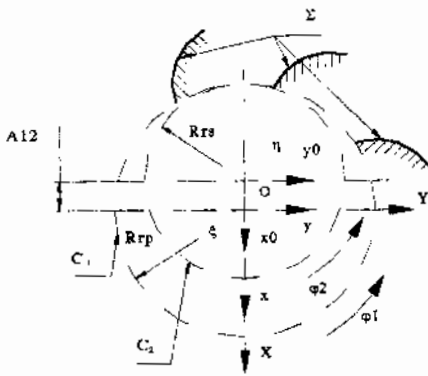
Gear-shaped cutter engendering (internal contact centroids).
